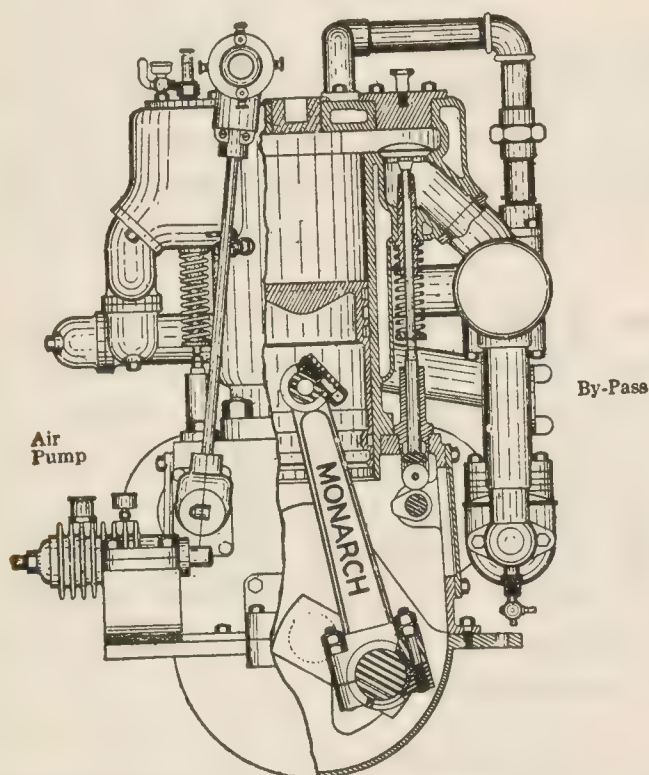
,114.—Sectional view of Monarch marine multiple fuel (gasoline, kerosene) engine showing by pass valve as described in fig. 10,115. Single fuel engine section would be the same except the inlet and exhaust manifold pipes would be different.
